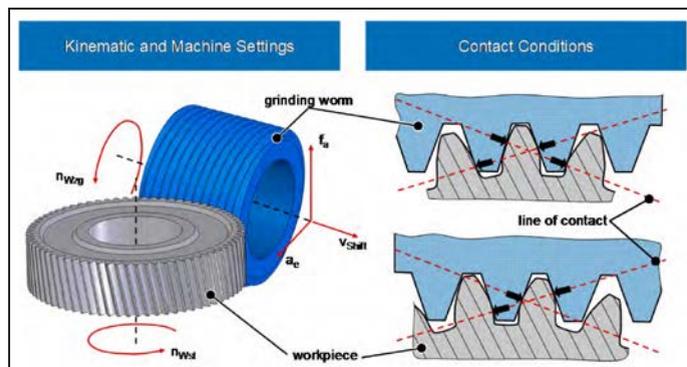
Generating gear grinding: principle, machine settings and contact conditions (all images courtesy WZL).
